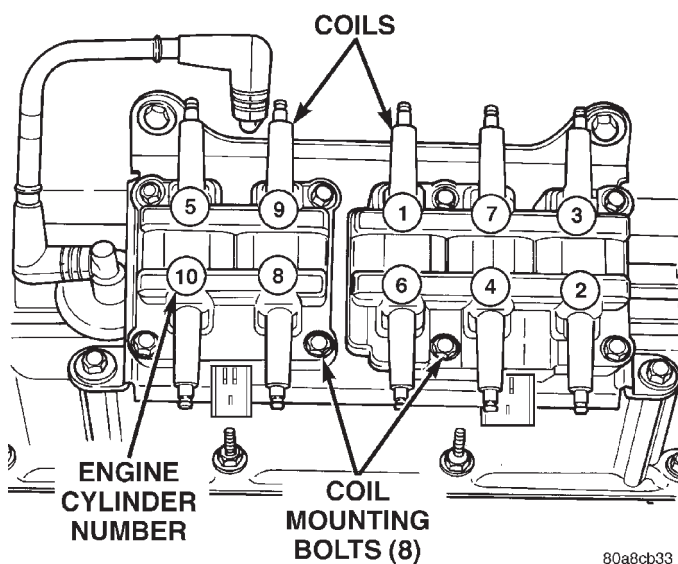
Ignition Coil Packs—8.0L V-10 Engine
